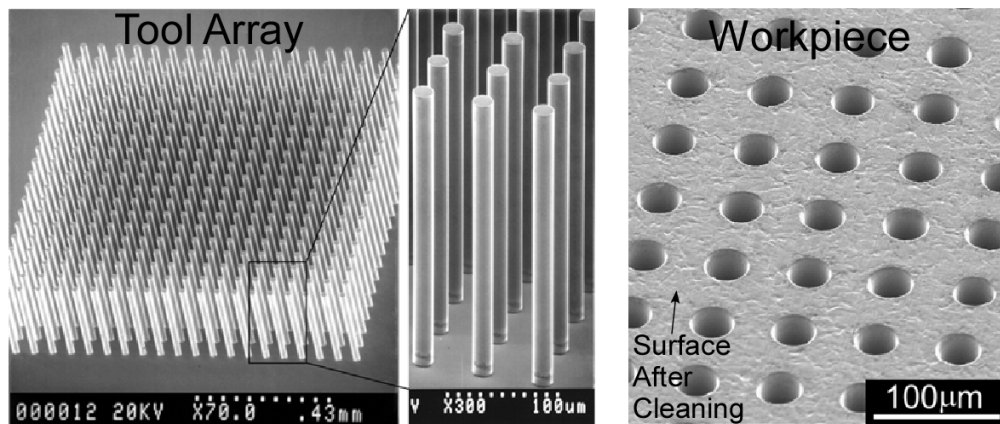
Left: Electroplated copper tools for batch  $\mu$ EDM fabricated by LIGA. Right: Resulting stainless steel workpiece after machining [Tak05].
